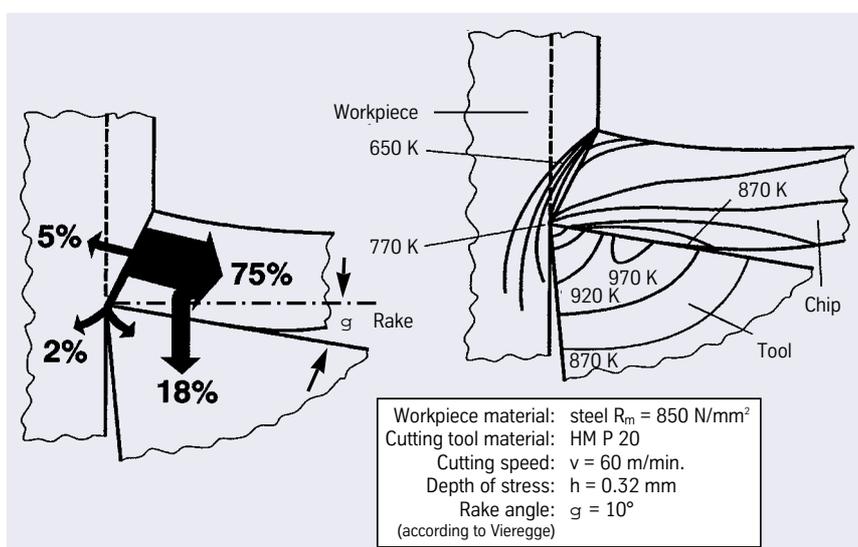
Heat distribution in the workpiece, chip and tool during machining of steel according to Kronenberg
